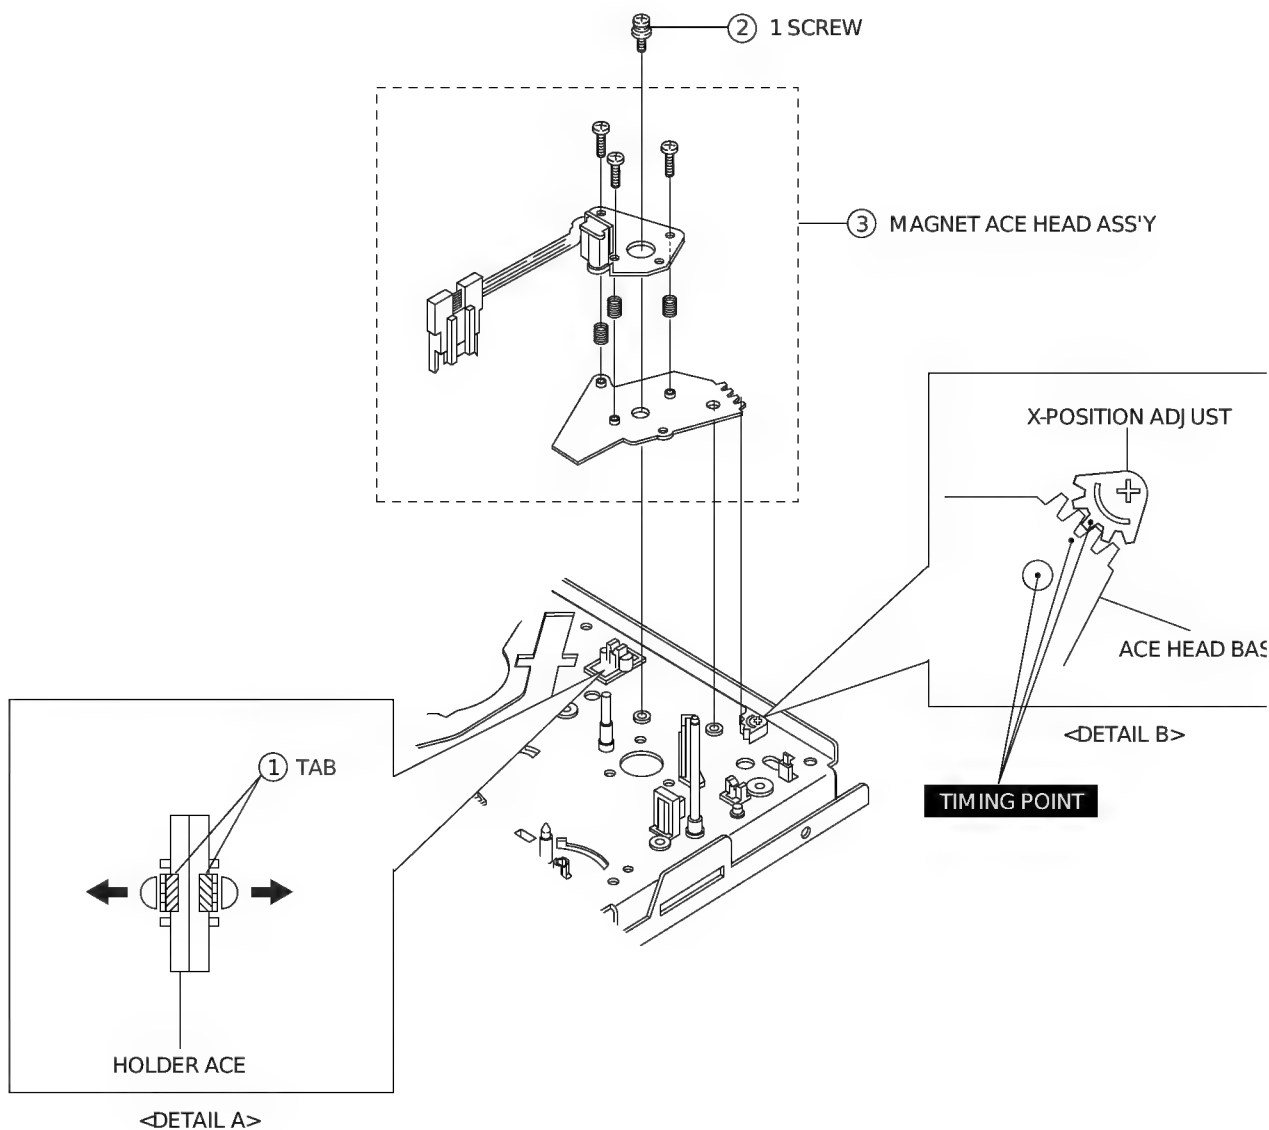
ACE Head Ass'y Removal and Reassembly
